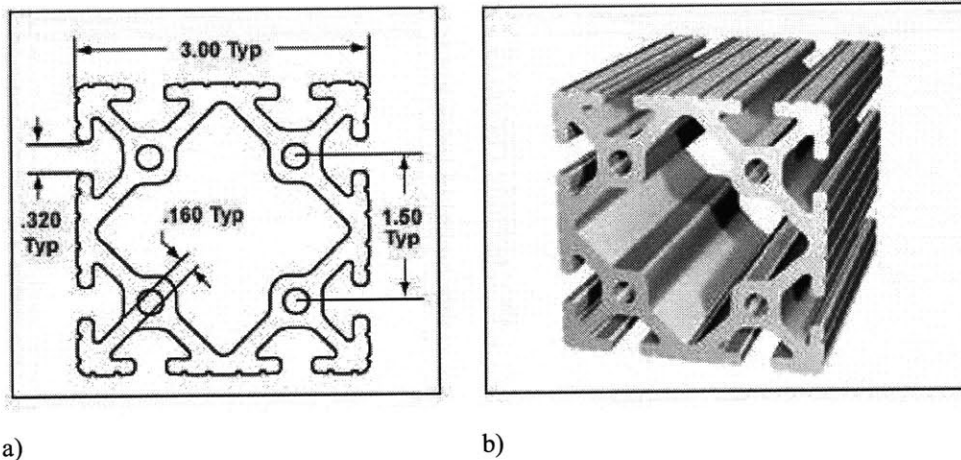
80/20, 3030 aluminum extrusion, a) front view and dimensions, b) isometric view [48].
